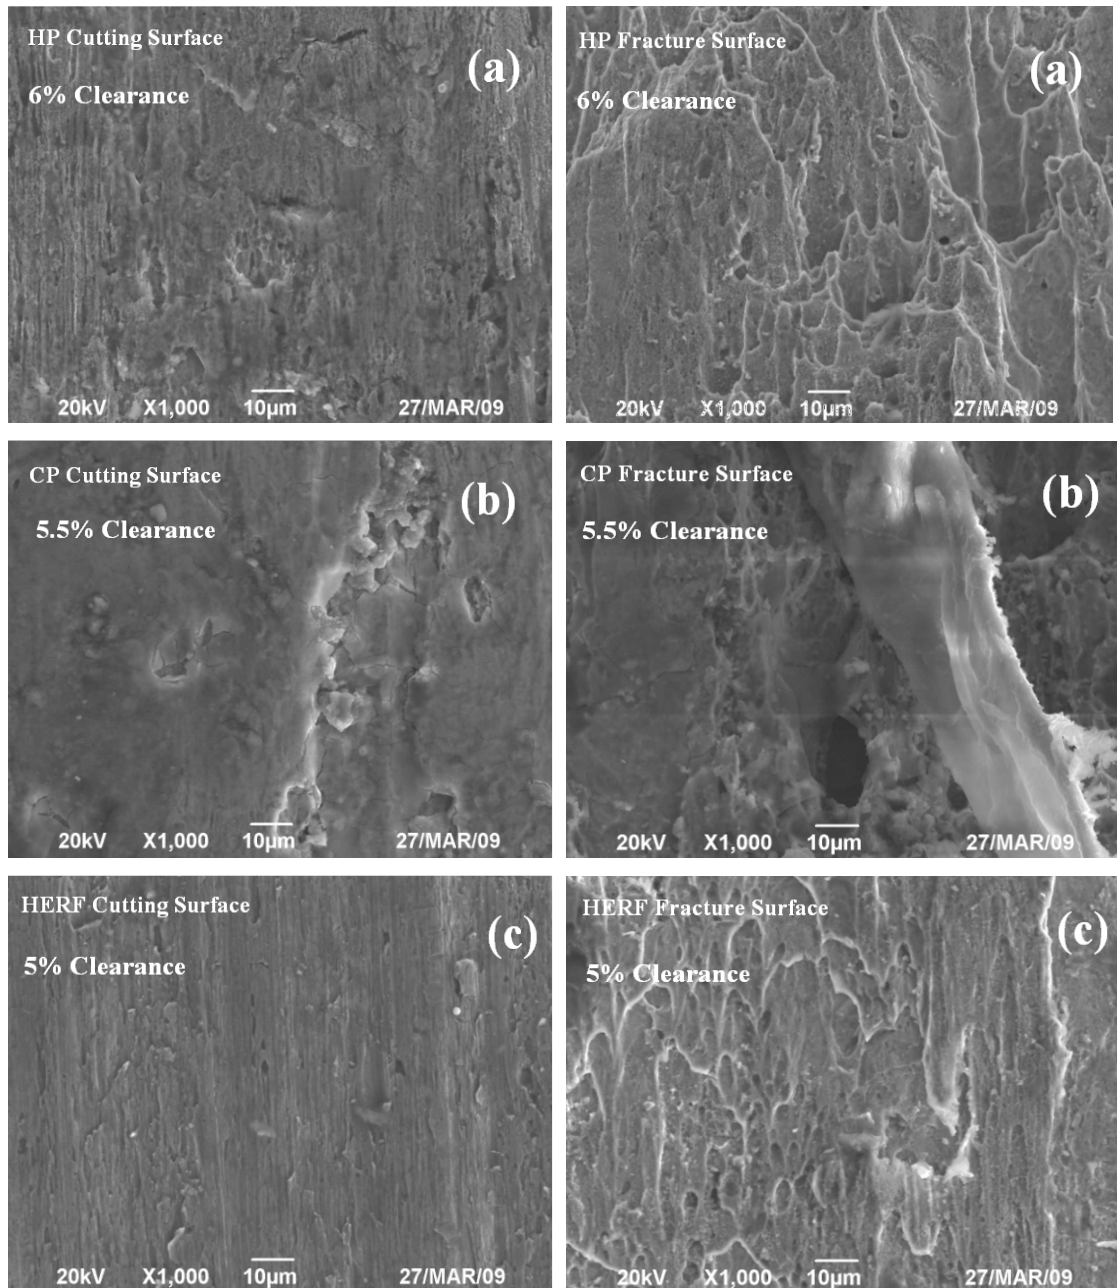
47 SEM views of the shear and fracture surface of the blanks after corrosion test for a) Hydraulic b) Conventional c) HERF
